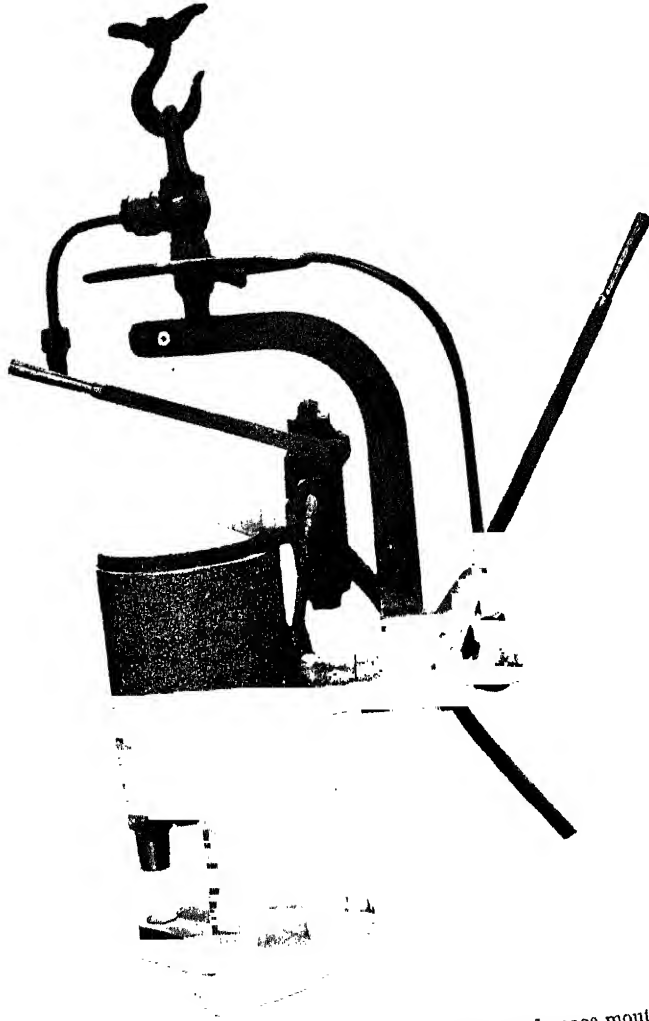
Portable hydraulic riveter for furnace mouths.
